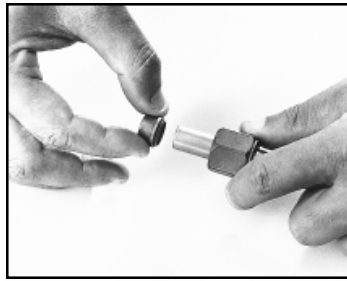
Slip nut and ferrule over deburred tube end. Be sure the long, straight end of the ferrule points toward tube end.
